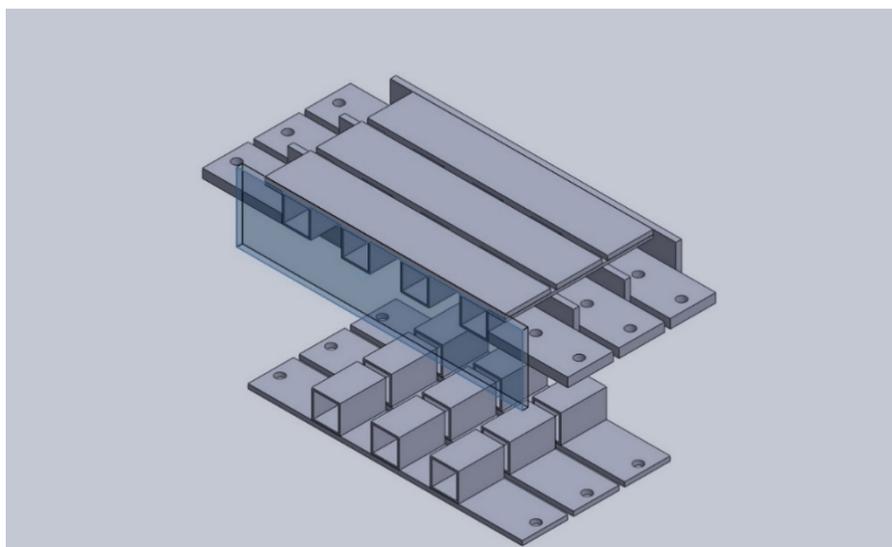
3D view of the holding tray with interlocking plates for adjustable compression
